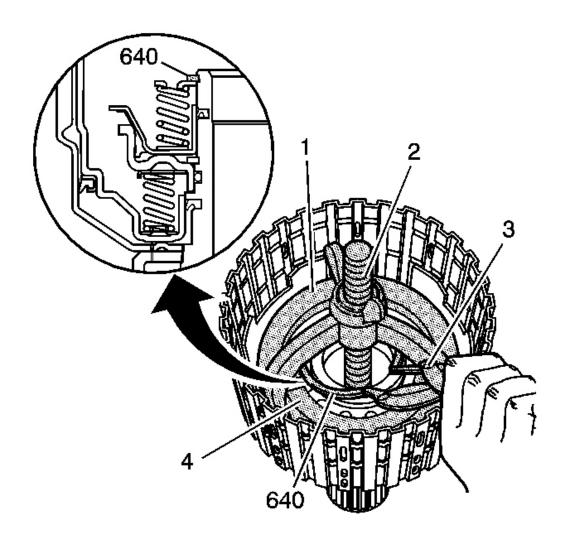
Compressing The Third Clutch Spring Retainer And Guide Assembly Using J 23327, J 25018-A & J 8059 Courtesy of GENERAL MOTORS CORP.
